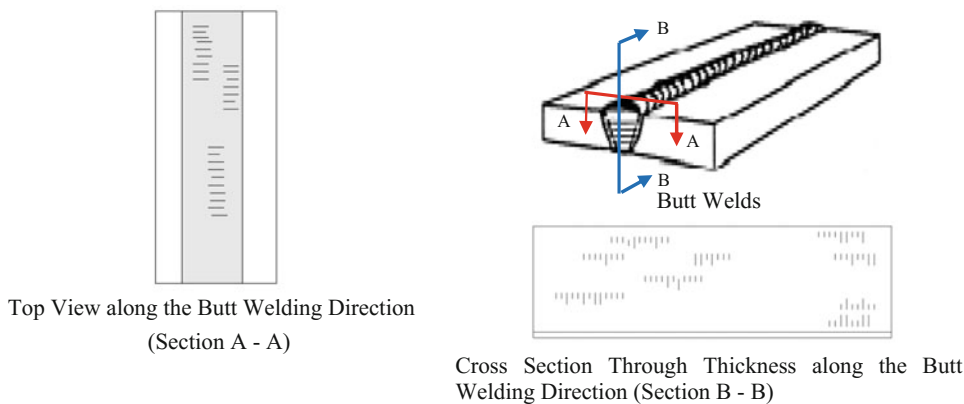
Schematic of reheat cracking of 2.25Cr-1Mo-V SAW welds. (Source: API RP934-A)
